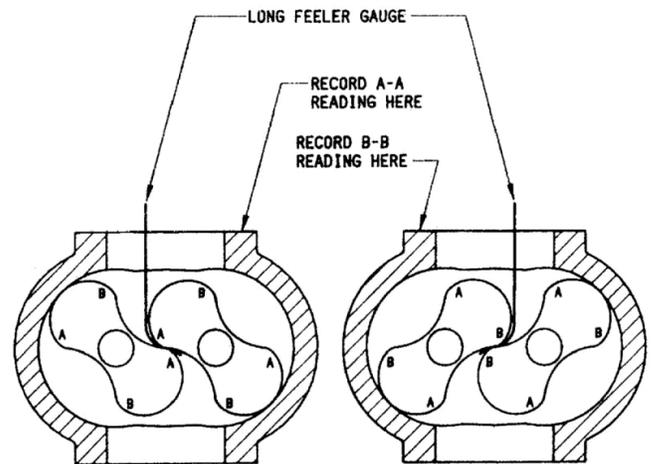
A Checking Interlobe Clearance on 2-lobe Models
